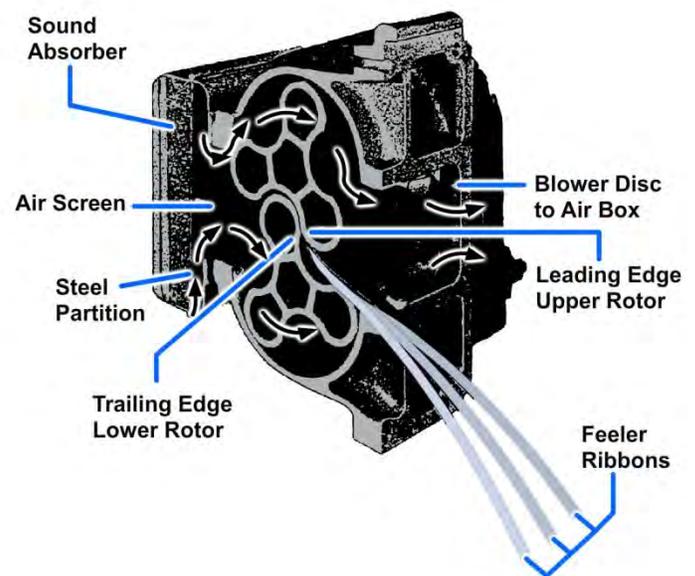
Checking clearances of positive-displacement blower lobes.
